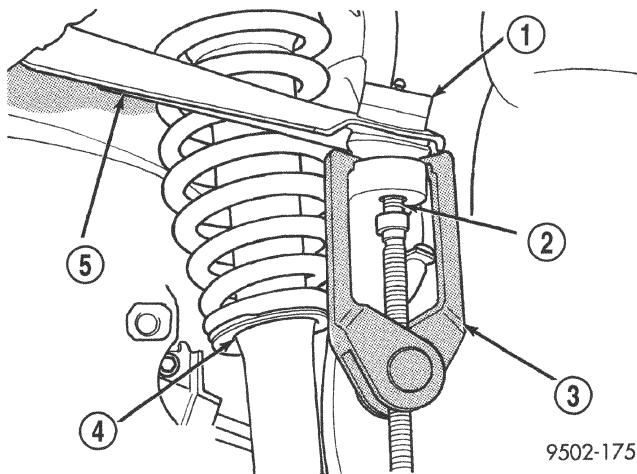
Upper Ball Joint Attachment To Steering Knuckle
